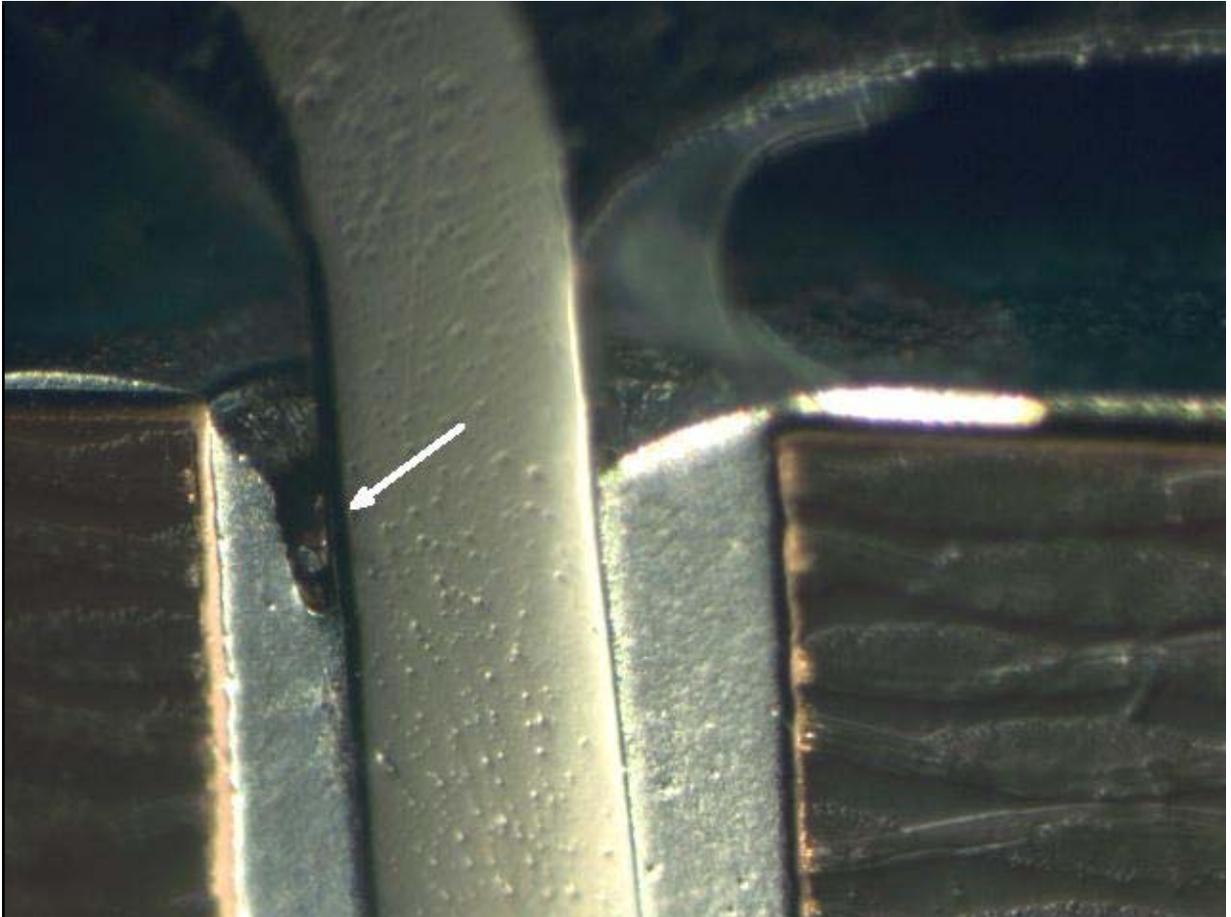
Cross-sectioned view showing the gap at the top of the hole where solder did not wet to the pin.
